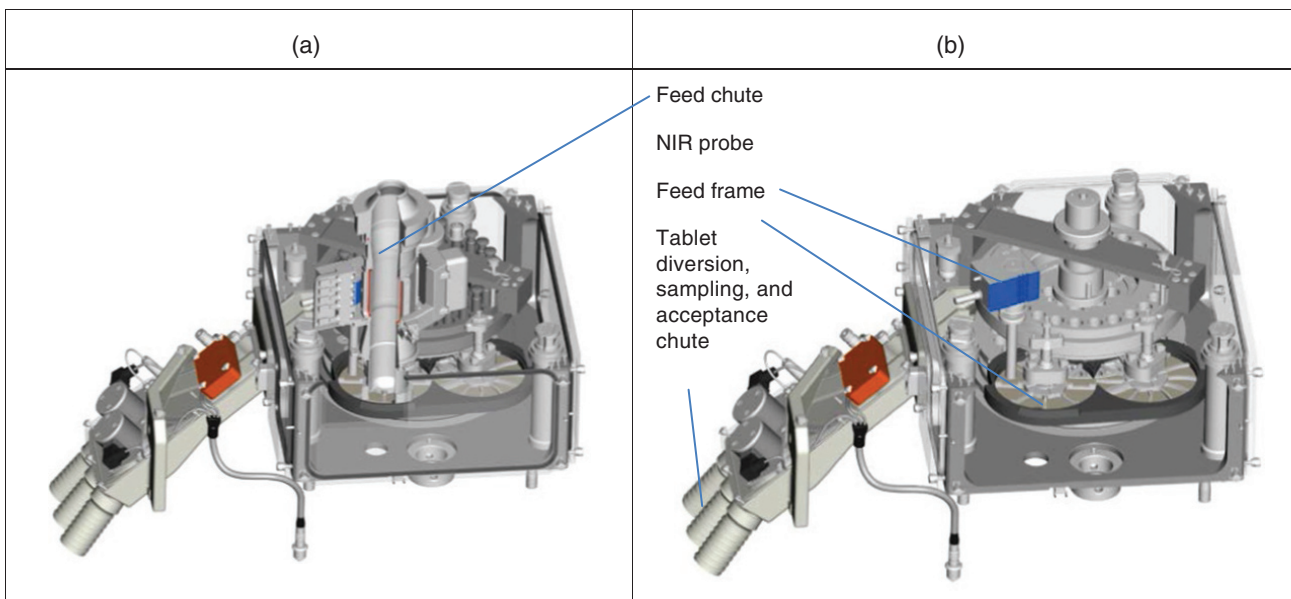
Design illustration of the GEA Courtoy MODUL P tablet press. (a) Shown with cross-sectional view of feed chute and (b) shown with NIR probe inserted into feed frame. *Source:* Courtesy of GEA Inc.
